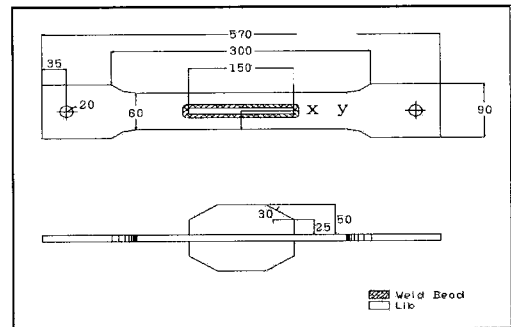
Nonload Carrying Fillet Weldment Specimen
